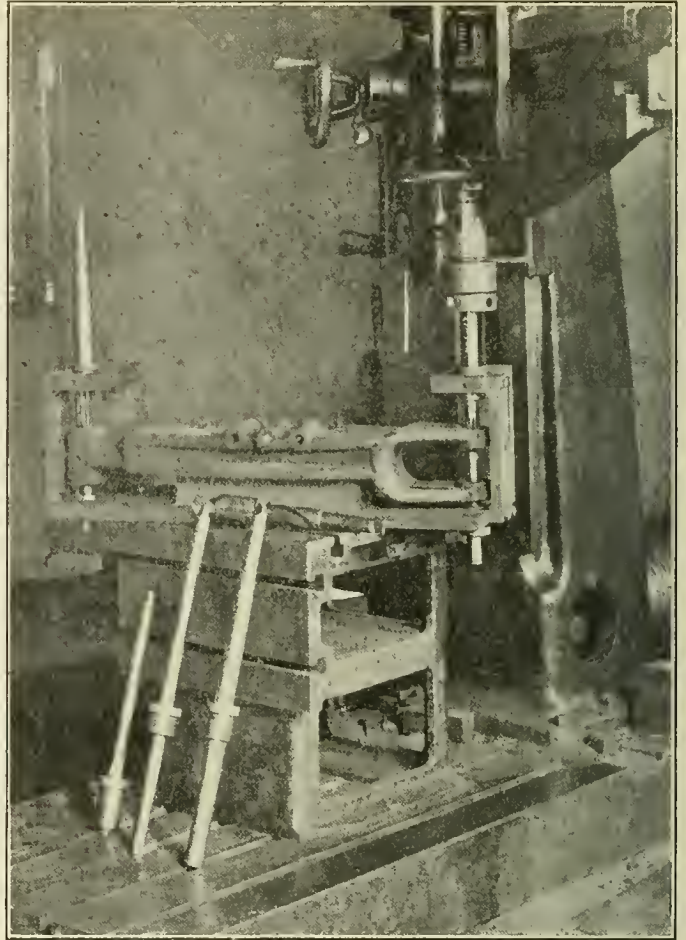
BORING JIG FOR ROCKER ARMS.
